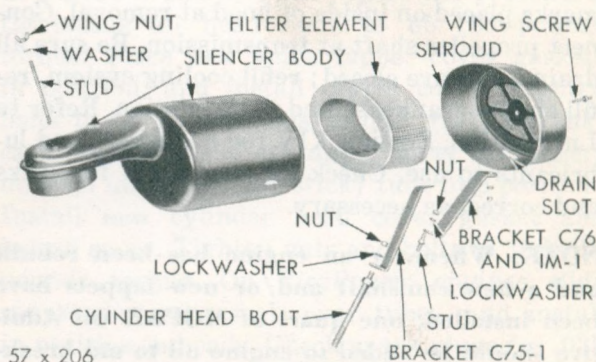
Carburetor Air Cleaner (Disassembled View)
